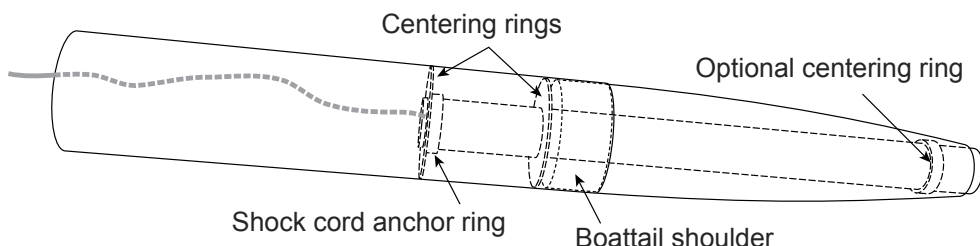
It is preferred that a long engine mount tube be used just to make sure the engine mount tube is straight and concentric.
